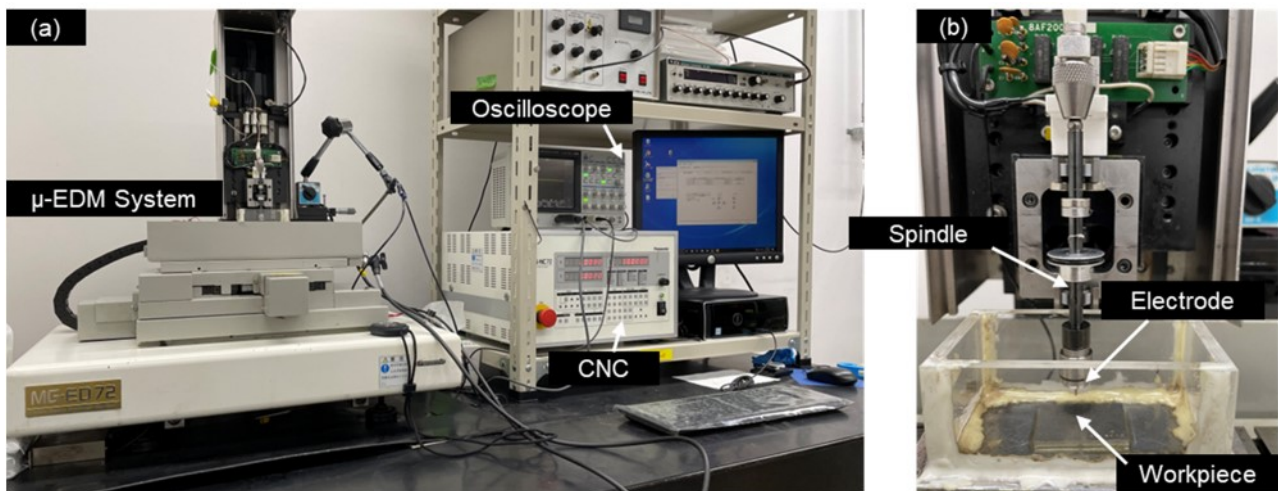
Photograph of (a) μ -EDM system, (b) electrode and workpiece arrangement.
